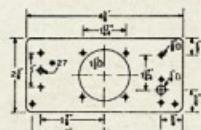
Dimensions of the front and back plates for the ARC-Port.
